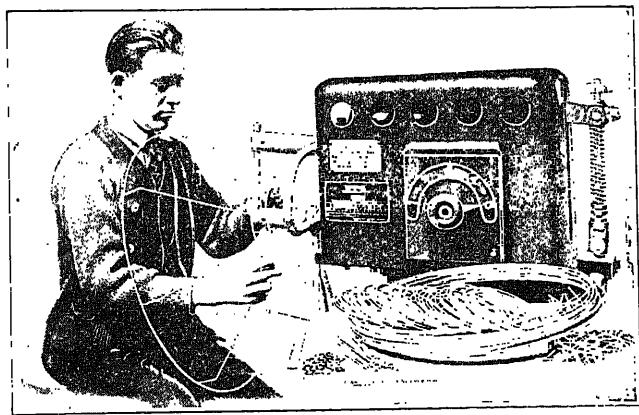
Mesh-Welding Lamp Shade Frames.
